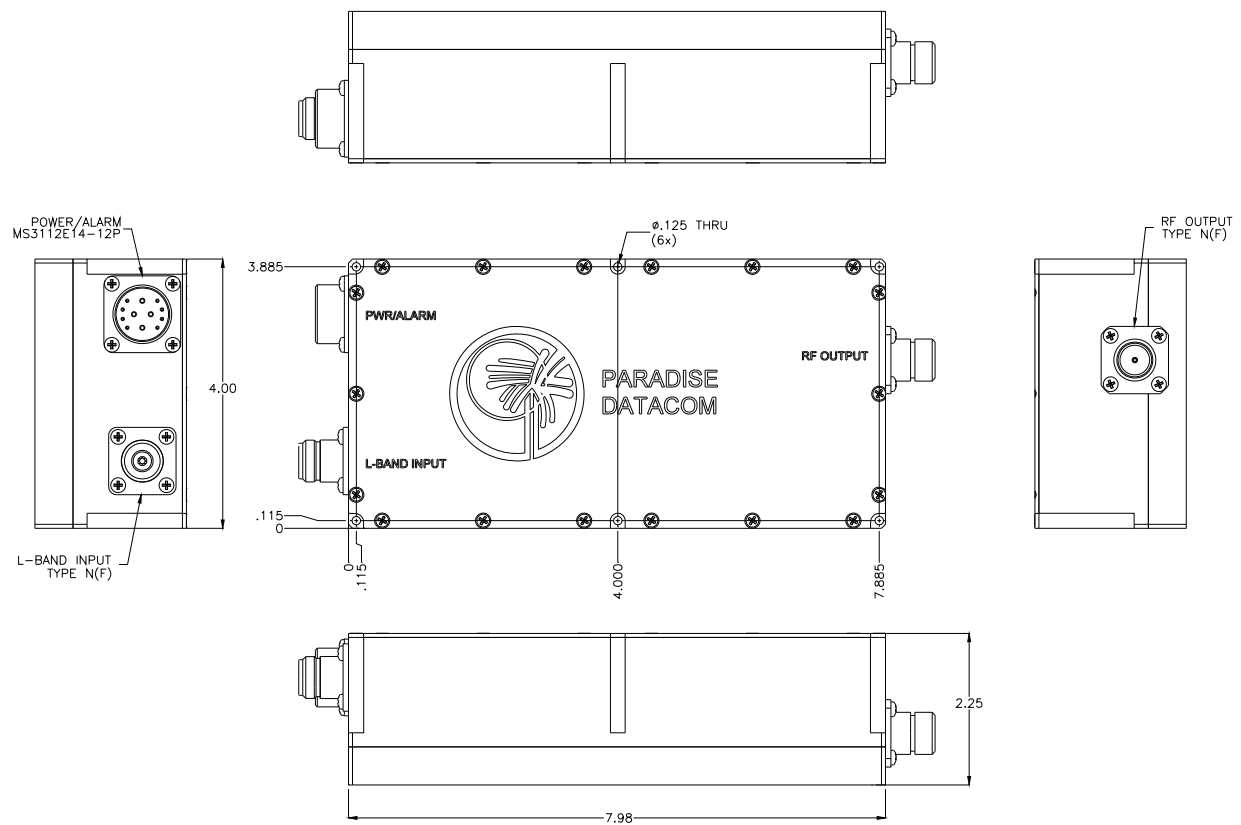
Outline Drawing, μ BUC, Ku- or X-Band
